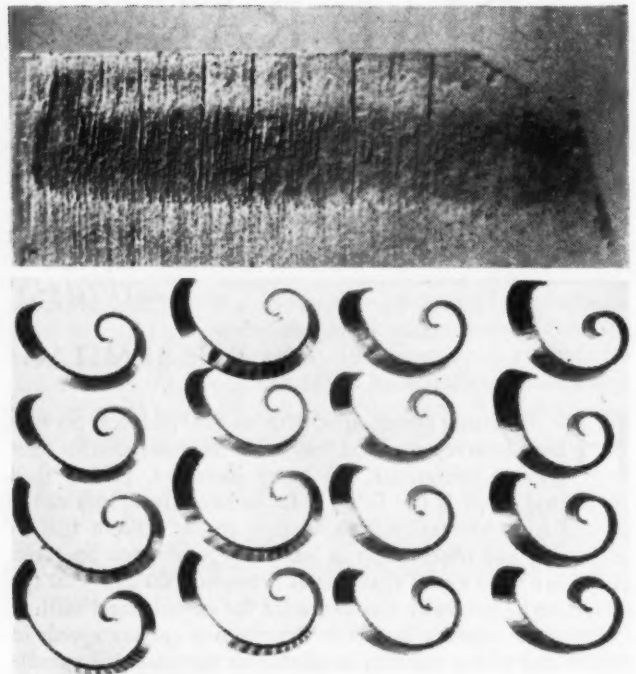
CUTTING EDGE AND CHIPS FORMED AT 895 FPM
